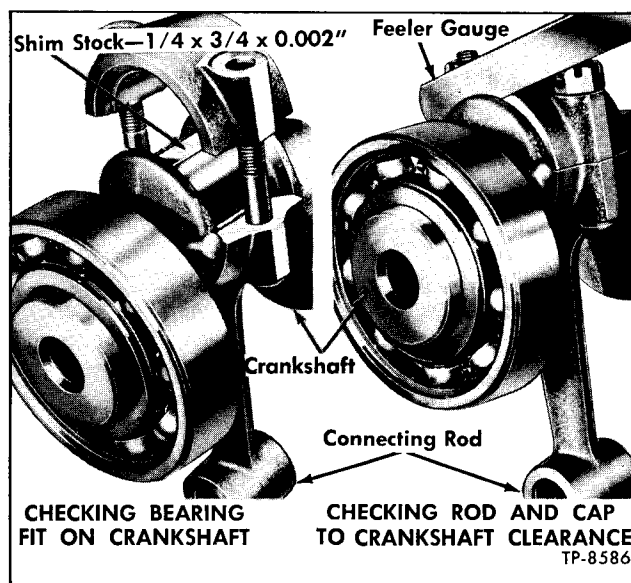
Checking Fit of Connecting Rod on Crankshaft
